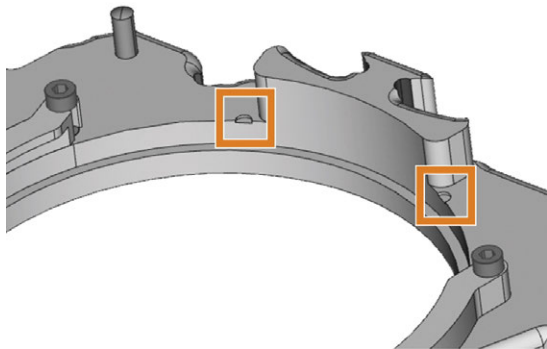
RECESSES (MARKED ORANGE) TO BE ALIGNED WITH MARKINGS FOR SAFER REMOUNTING
